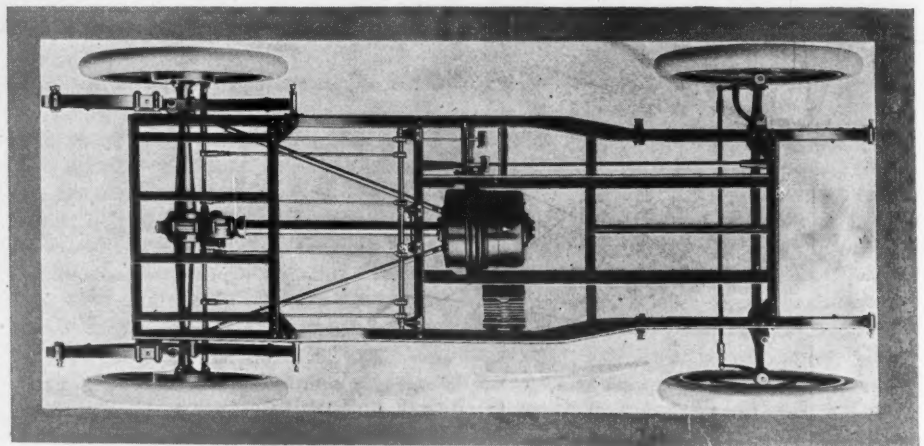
PLAN VIEW OF STANDARD, SHOWING DRIVE
